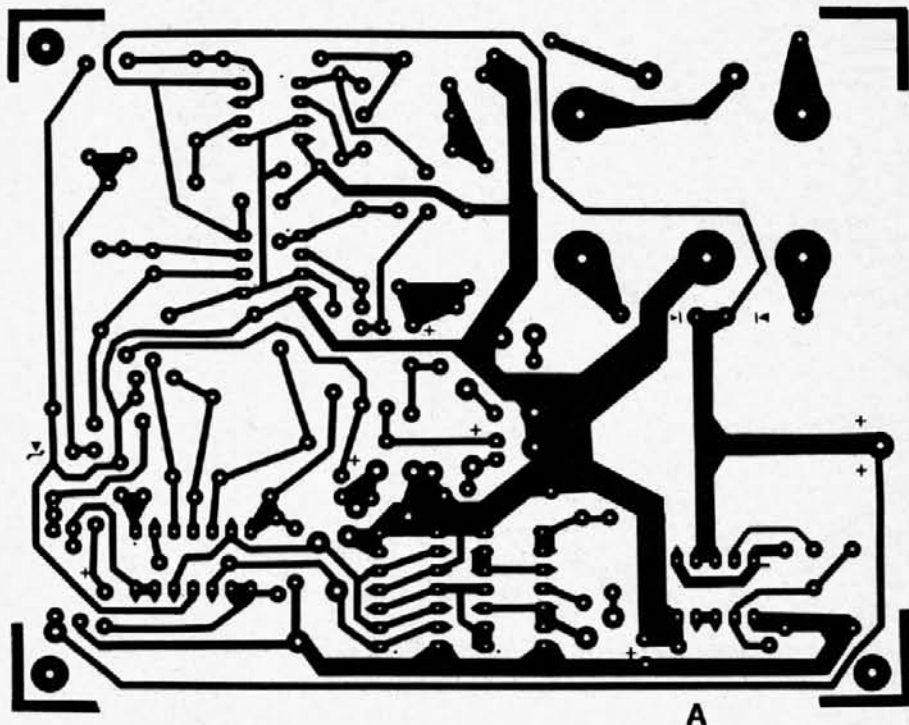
Above (A) is etching and drilling guide for pc board. It can be used for either channel for delay-line circuit, or for the phasor/flanger. At left (B) is component layout for one channel of delay line. It includes the power supply. Component layouts for phasor/flanger and second channel of stereo delay line are on next page.
